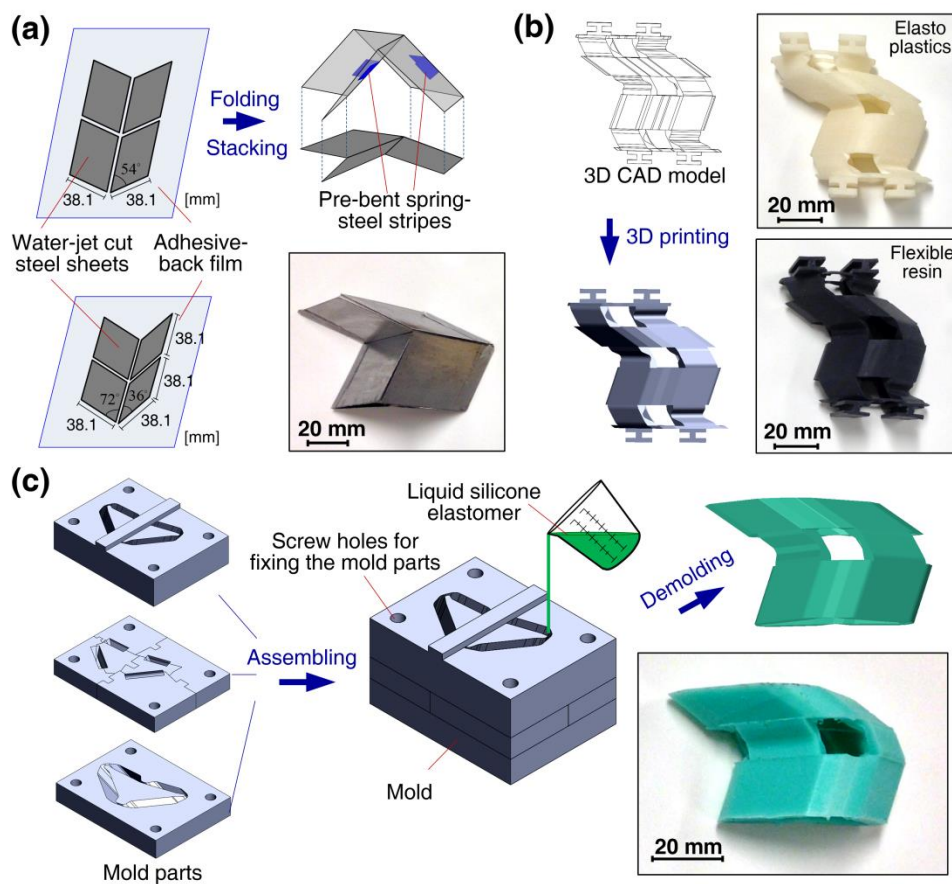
The main steps for fabricating a) the steel prototype (the SC pattern dimensions are given), b) the 3D-printed prototypes, and c) the silicone elastomer prototype.
